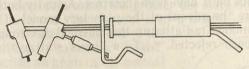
Welding torch for producing atomic hydrogen flame
